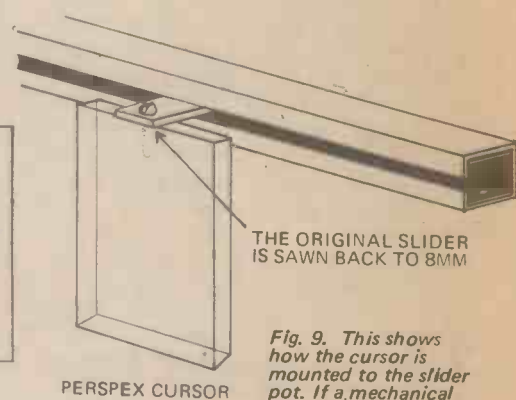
This shows how the cursor is mounted to the slider pot. If a mechanical drive mechanism is to be used the drive cords can be attached to a tag under the screw.
